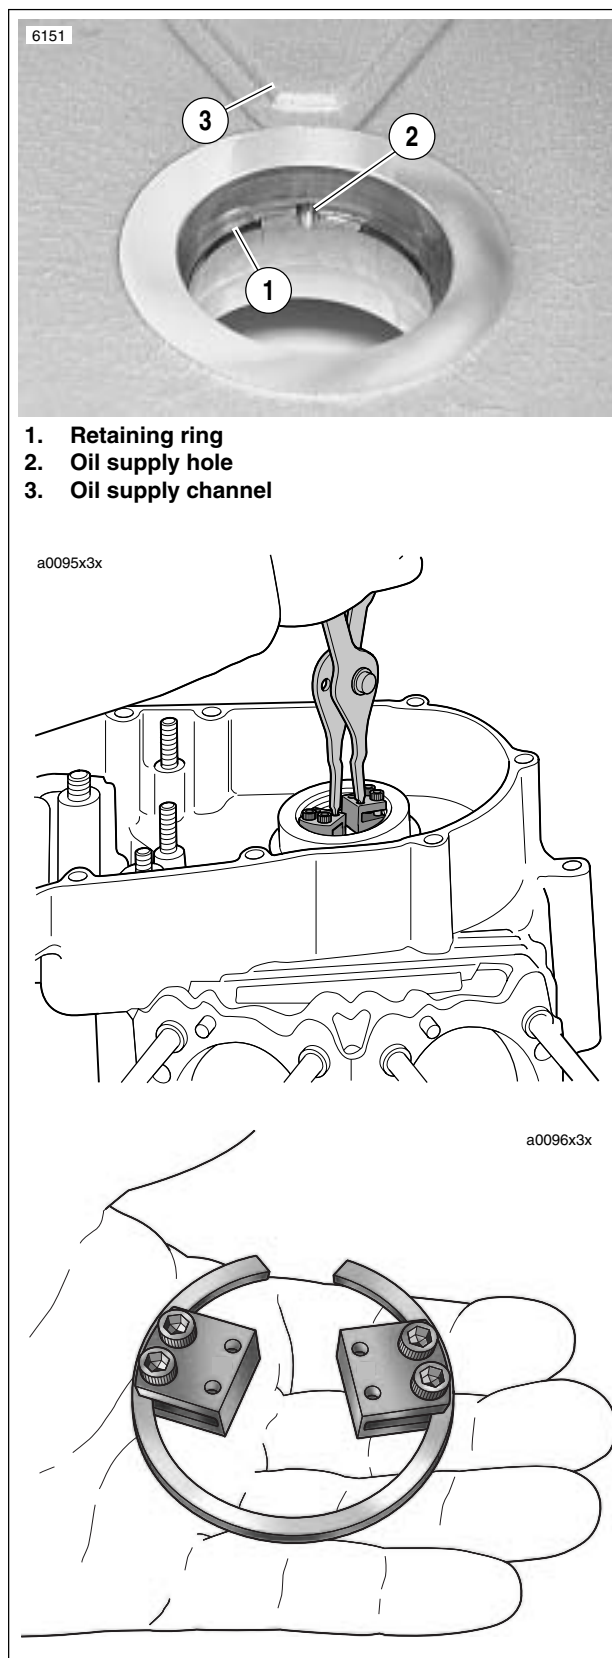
Snap Ring Installation Using Retaining Ring Remover/Installer (Part No. HD-44069)
